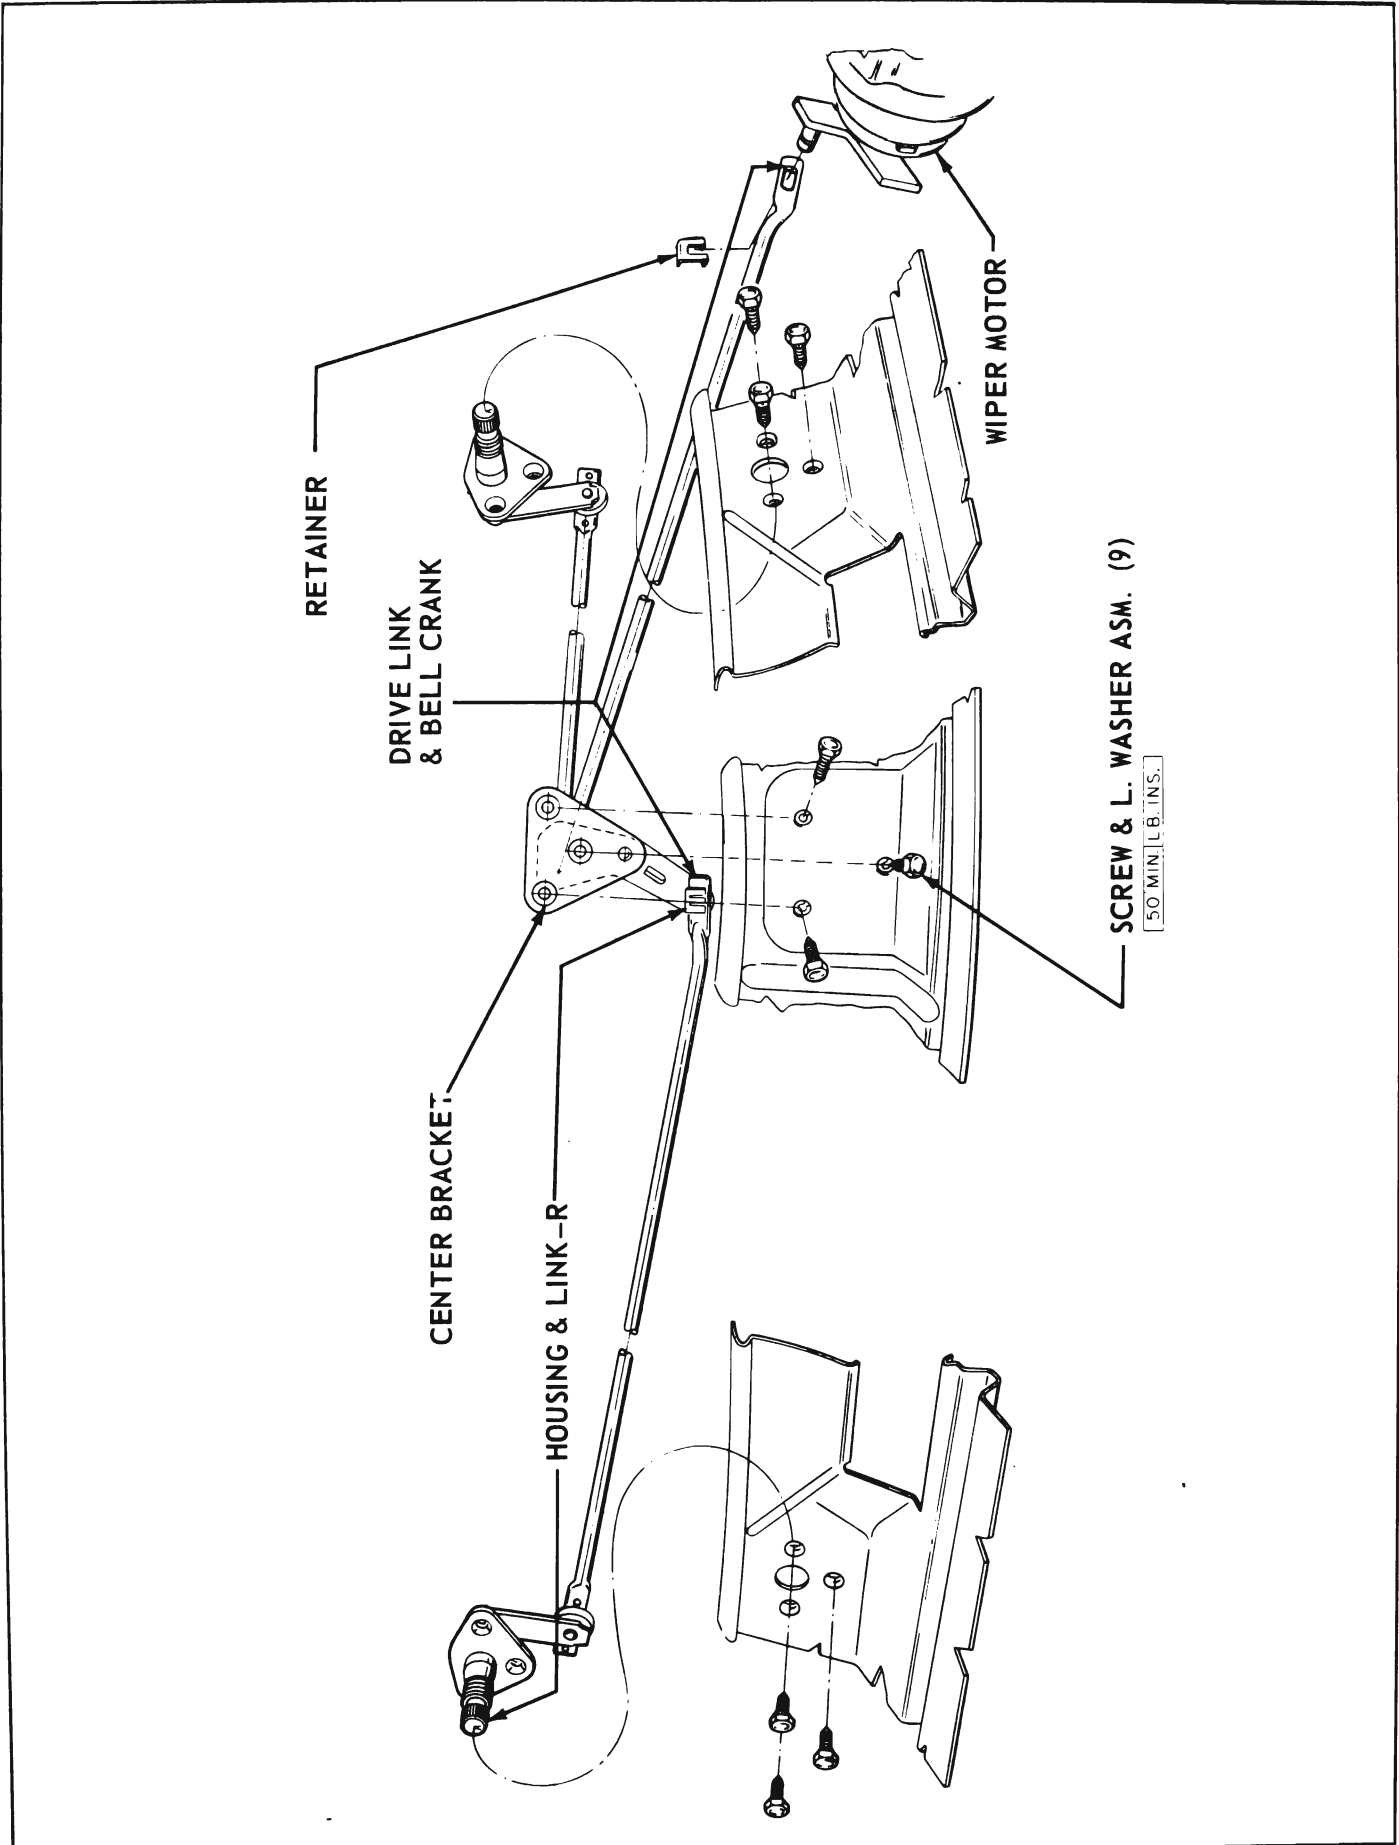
Windshield Wiper Linkage Installation—Riviera
